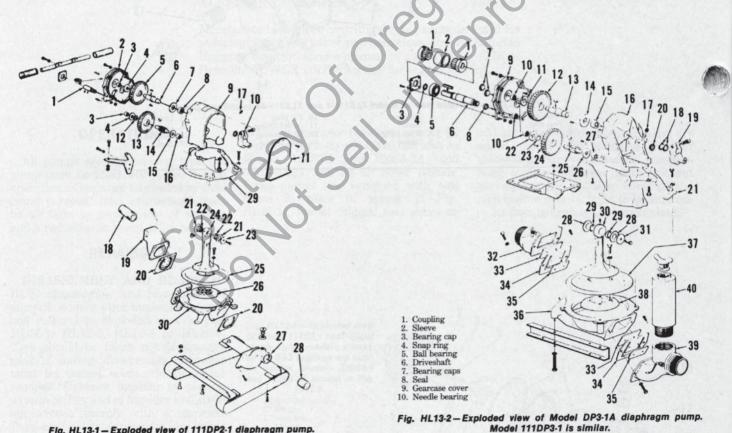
Exploded view of 111DP2-1 diaphragm pump.
